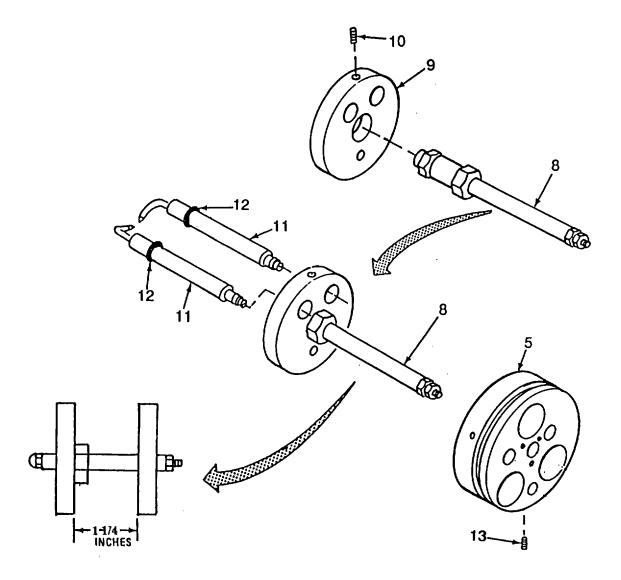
Burner Assembly (Sheet 2 of 5)
